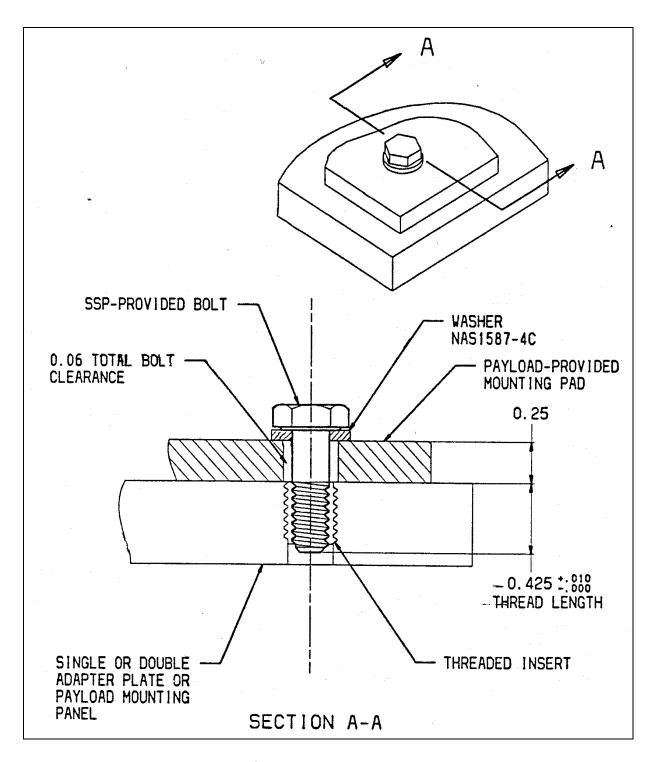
PAYLOAD/STS ATTACHMENT POINT DETAILS FOR NO PLANNED ON-ORBIT TRANSFER
